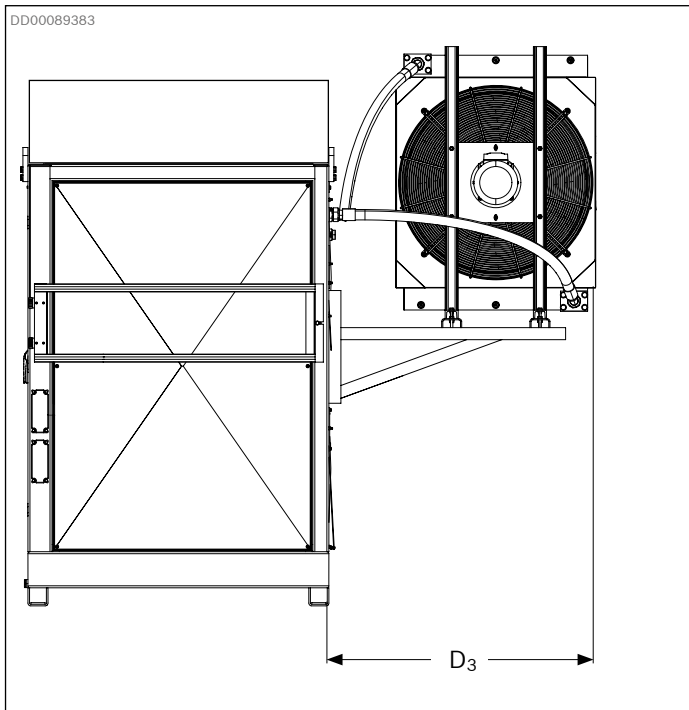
Right side view, example DUE Medium and air-oil cooler
